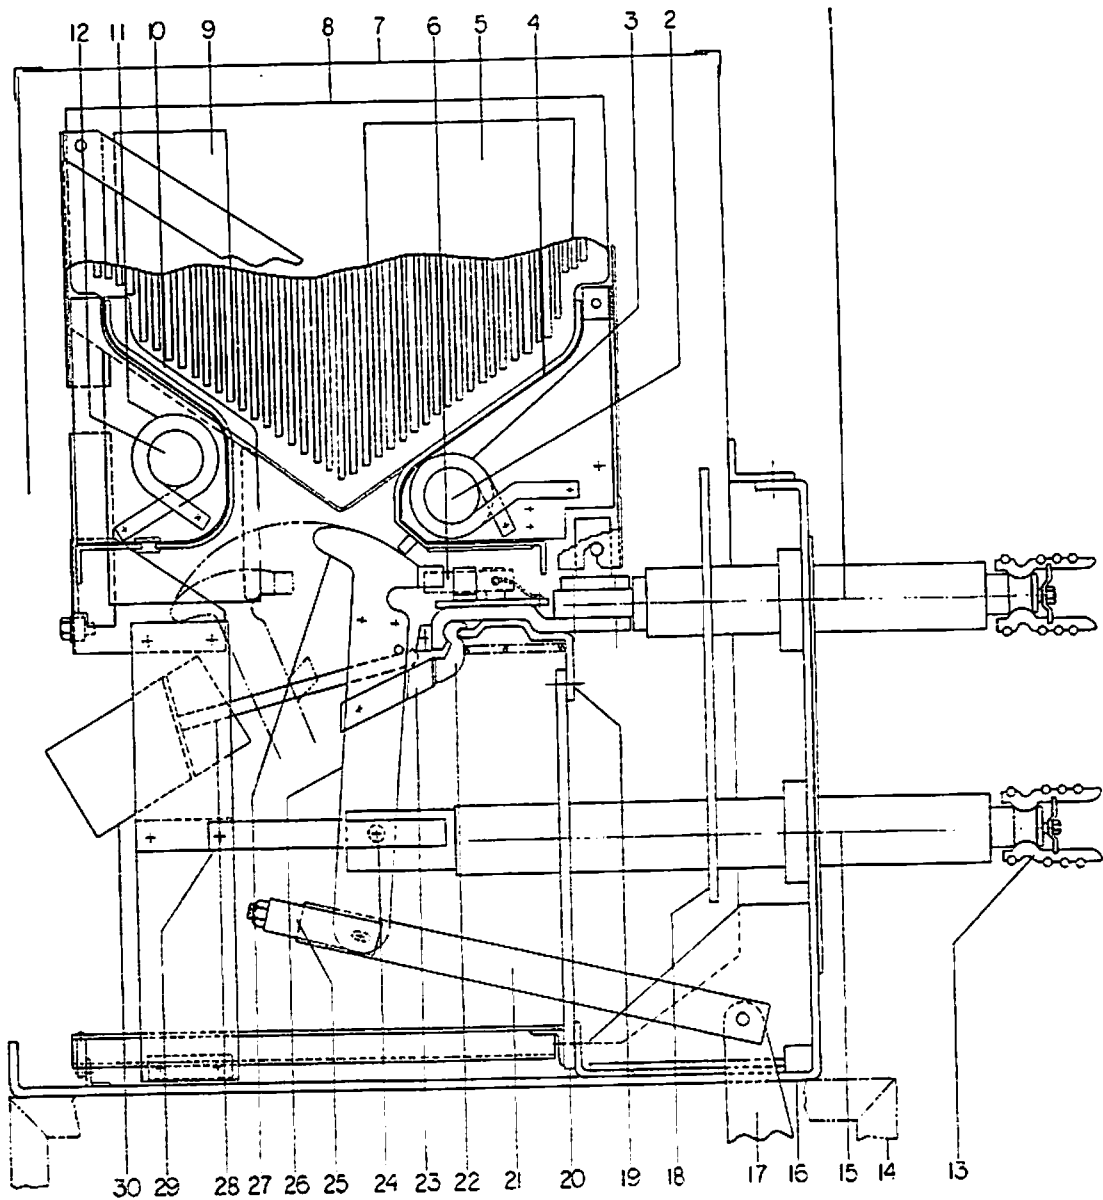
(0121C8153) Cross Section of Breaker Pole Unit
